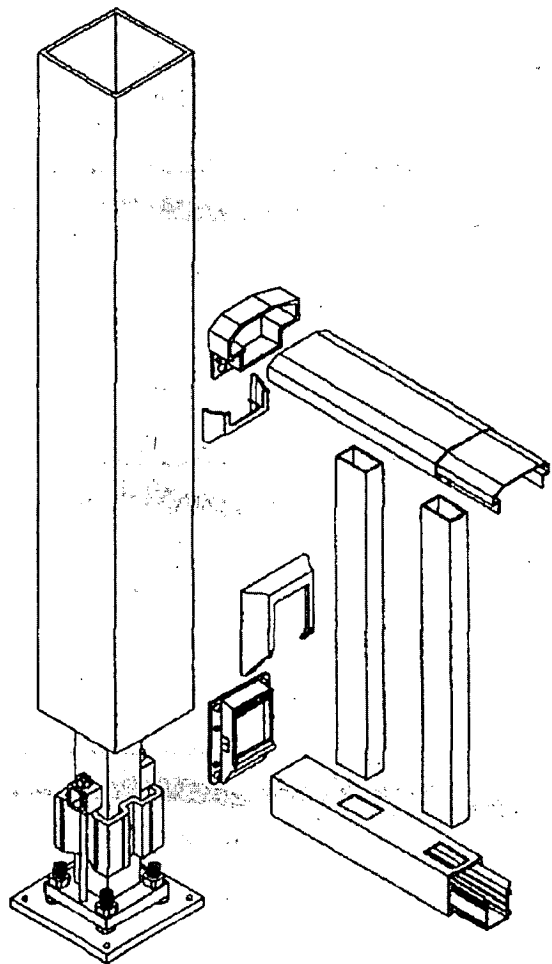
RAVEN GUARDRAIL SYSTEM ASSEMBLY
